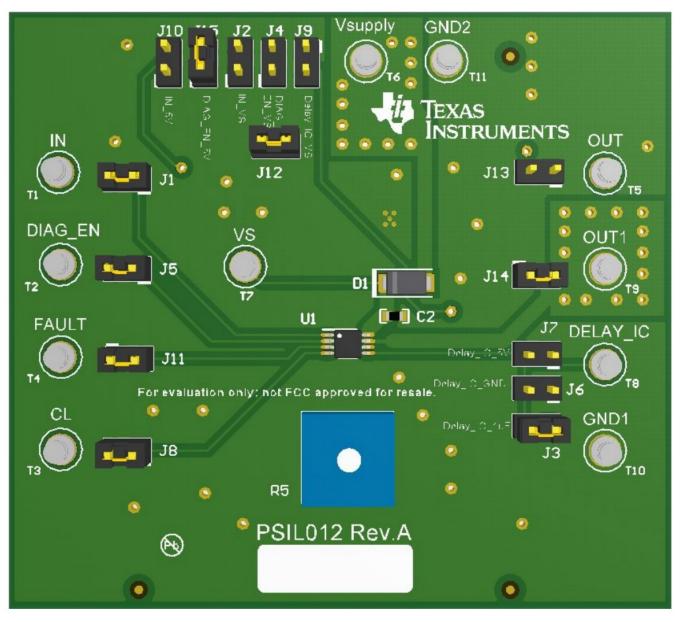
TTPS1H200-Q1 EVM Component Placement (Top View)
